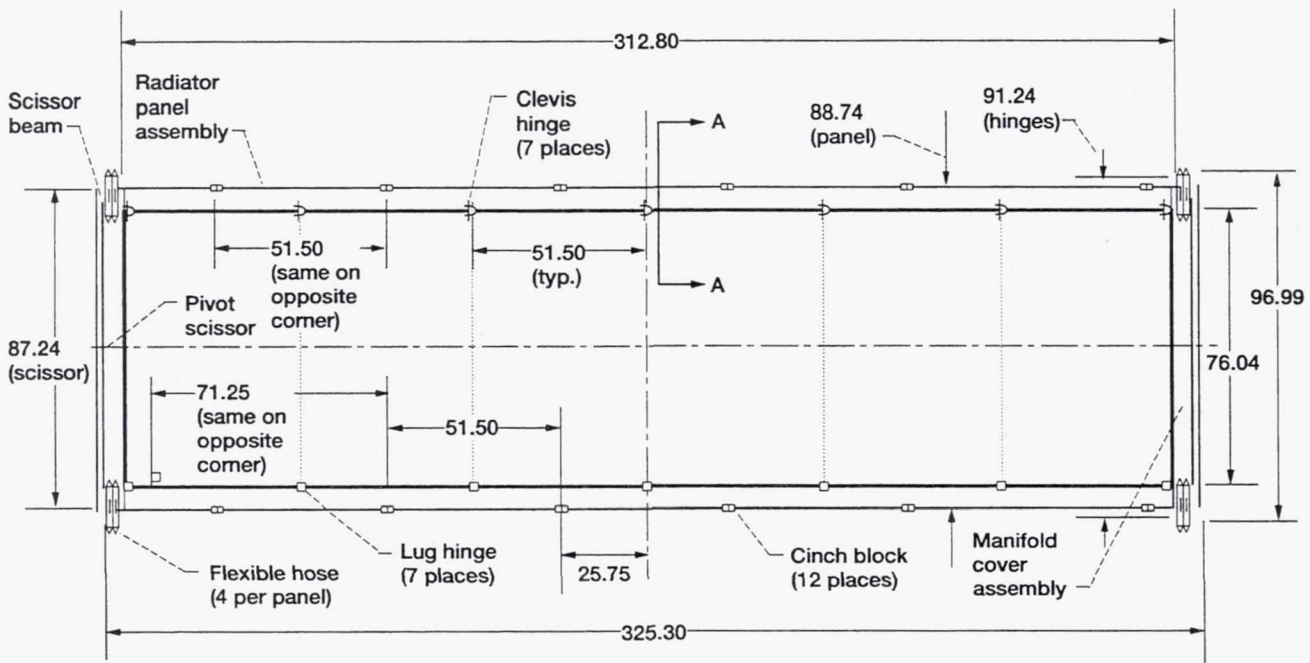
Radiator panel design. (Dimensions are in inches.)
